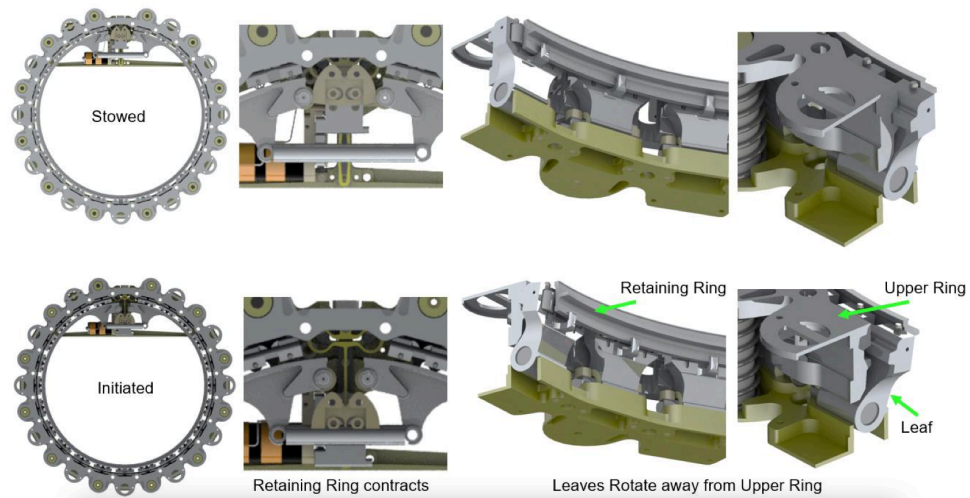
Rocket Lab's hold and release clamp [6]
